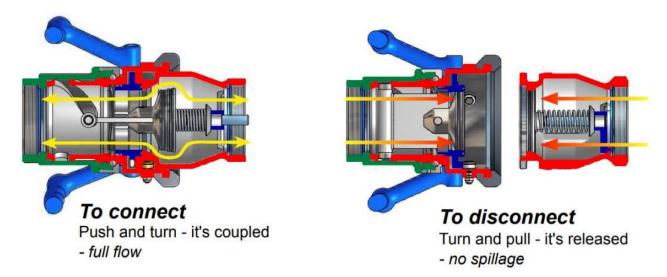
Bunkering connexion between the hose and the bunker station [56]
